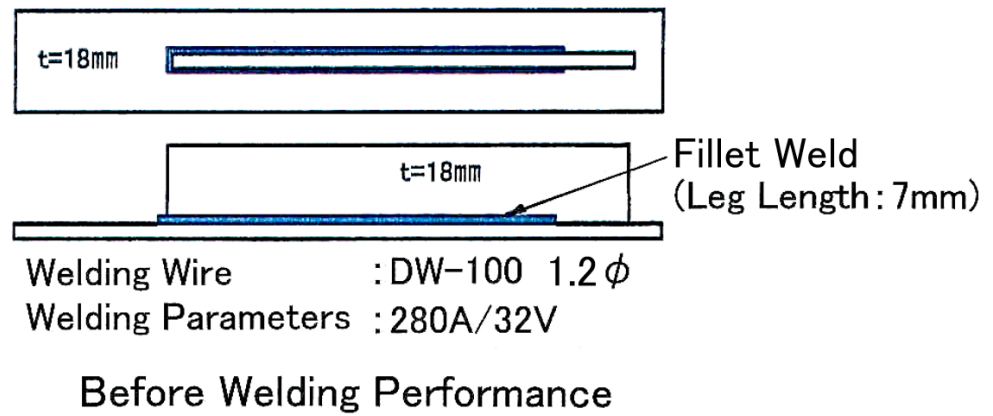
Test specimen for welding procedure test of elongated bead length
